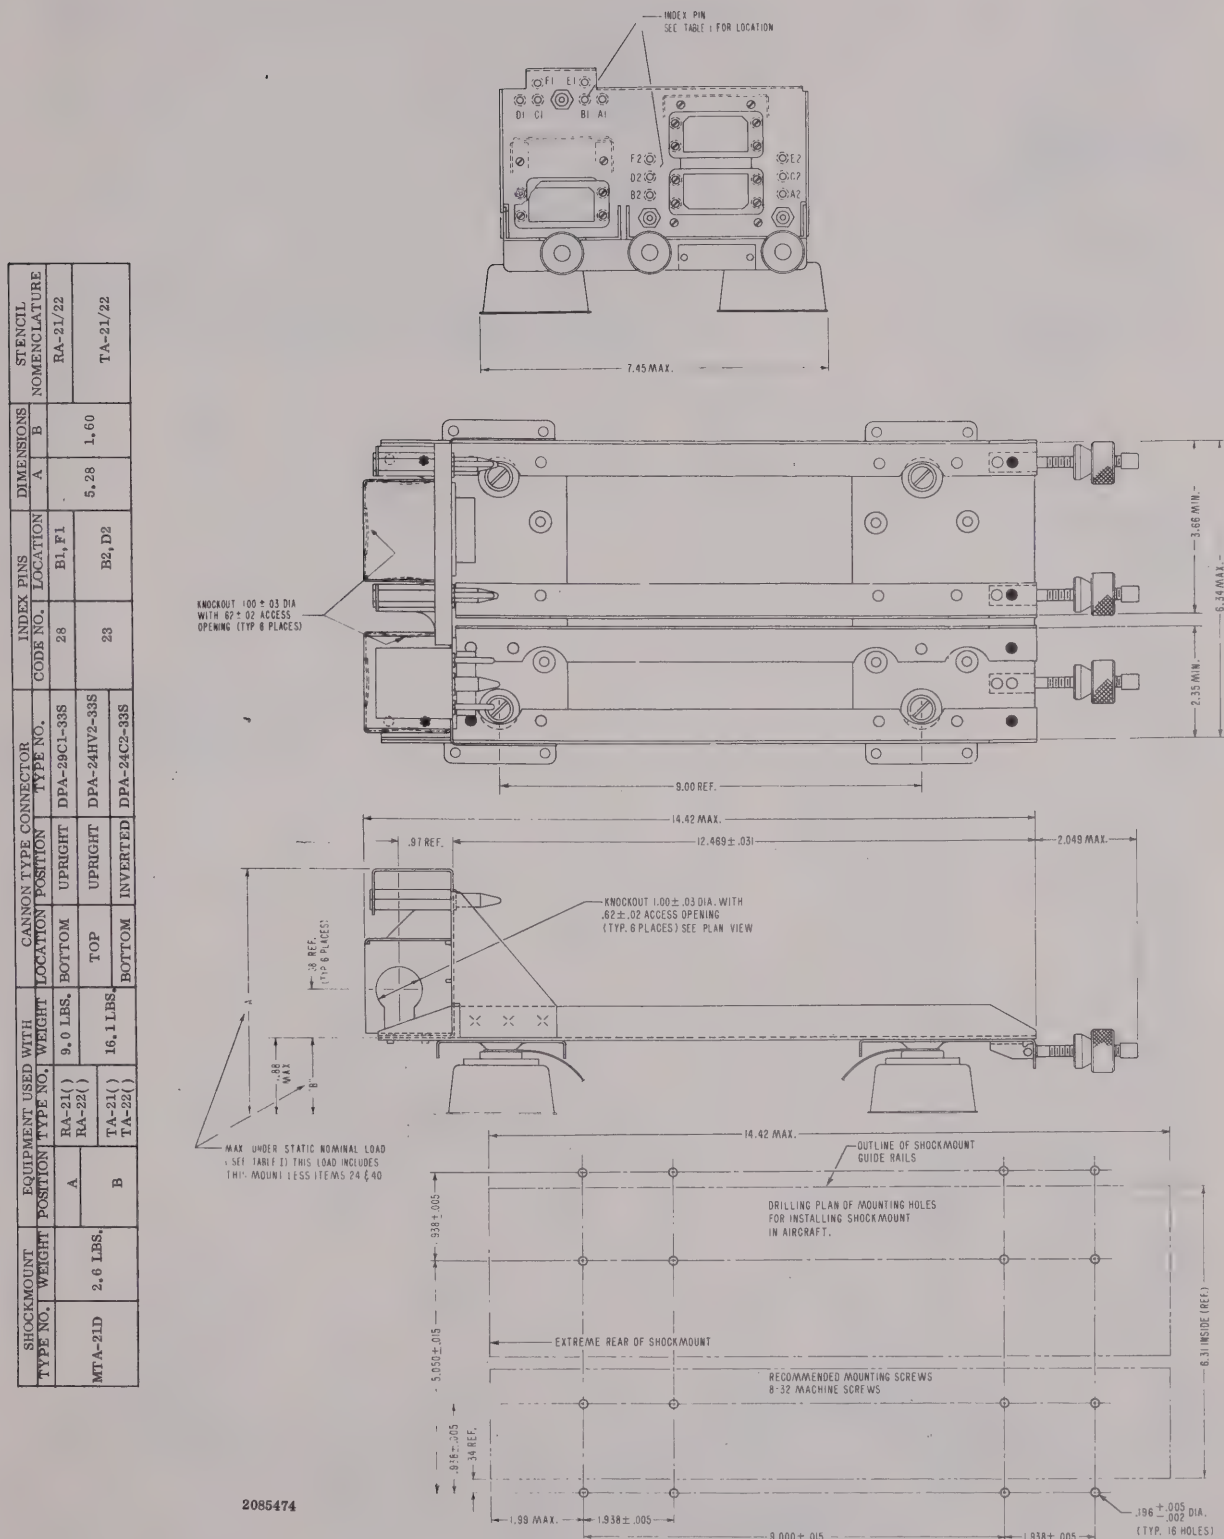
MTA-21D Shockmount, Dual (For Receiver and Transmitter), Outline Drawing
